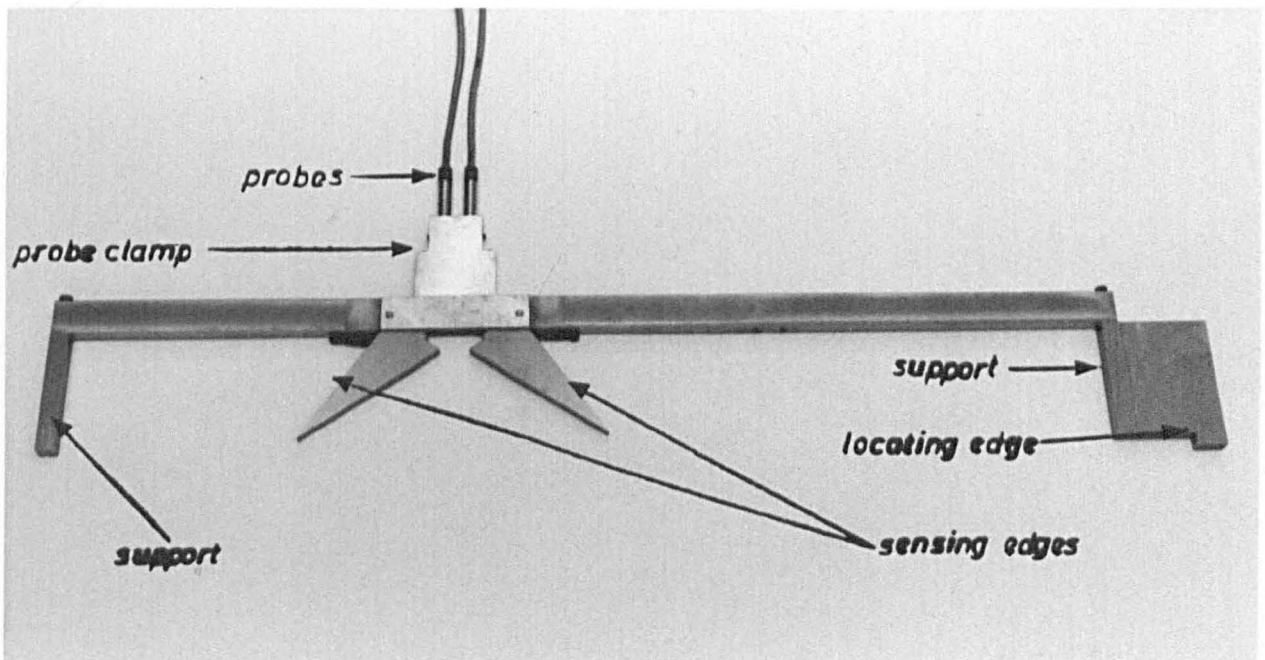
Shaft Horizontal Misalignment Measurement Jig
